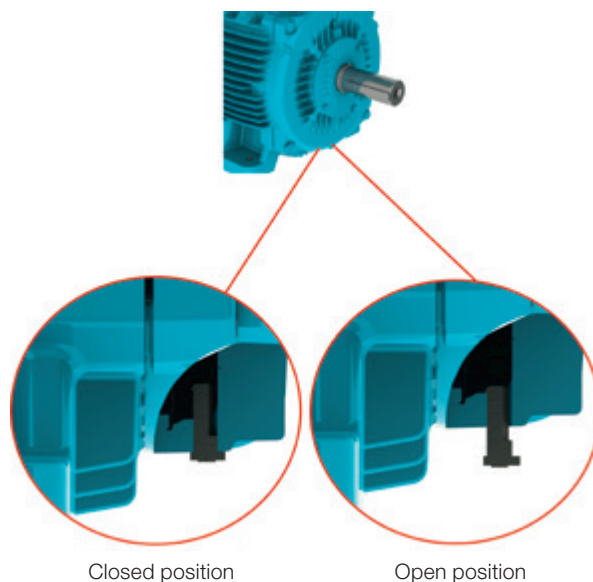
Detail of the rubber drain plug mounted in closed and open position
